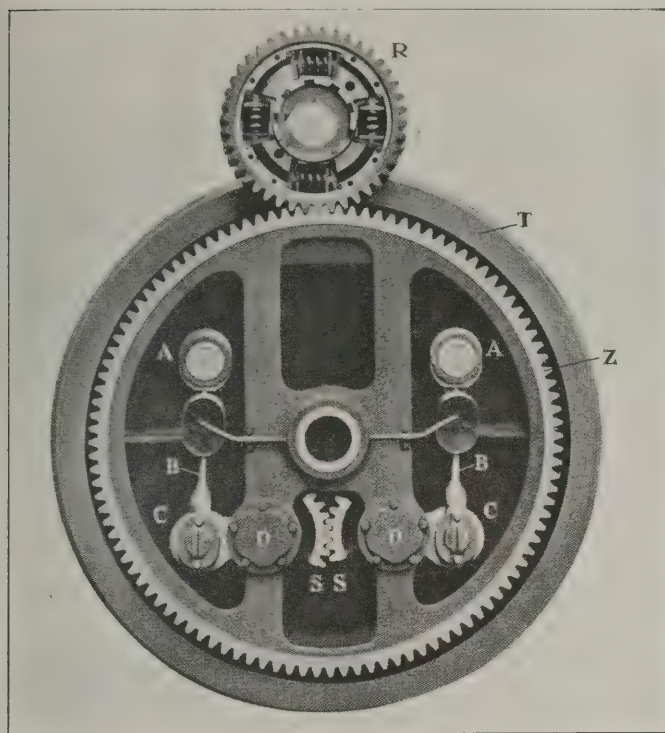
Pinion, Gear and Driving Wheel as Assembled in the Individual Axle Drive
